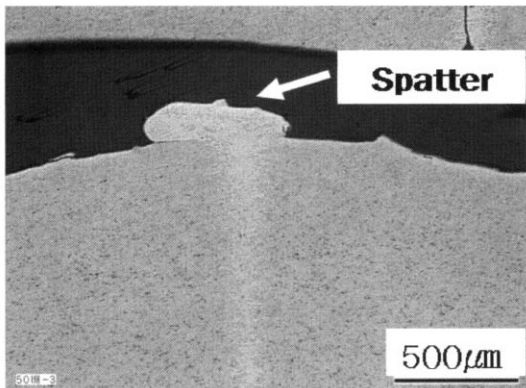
Cross section of weld bead in A3003 alloy.
